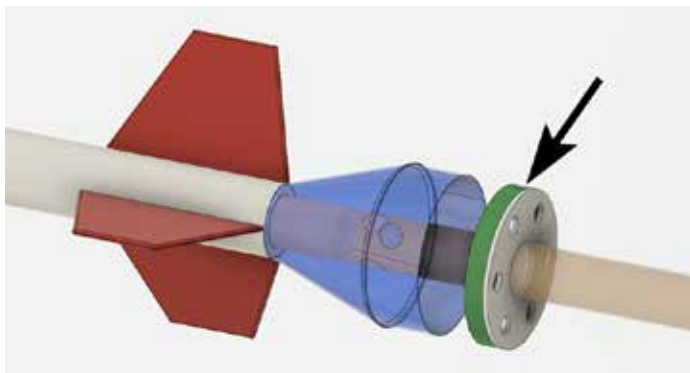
If the ring doesn't contact the shoulder piece, then you'll need to add a short tube (the green piece) in front of the centering ring.
